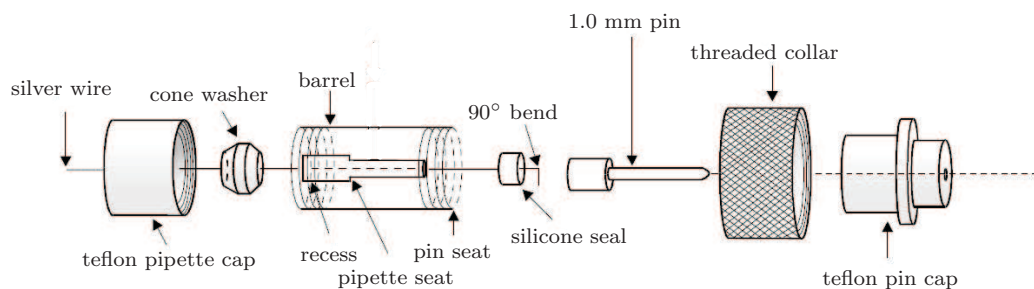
Exploded view of the HL-U original pipette holder made of polytetrafluoroethylene resin (PTFE) and polycarbonate used as mechanical connection between the silver wire and the headstage. [Molecular Devices Corp., 1999].
